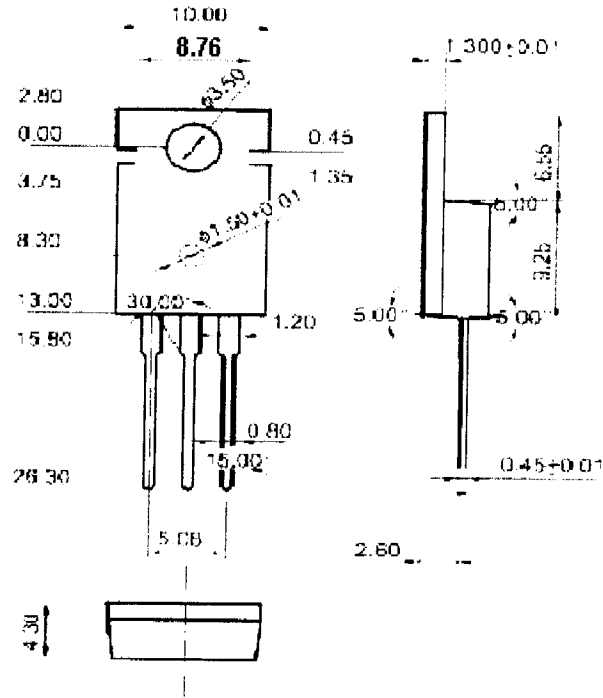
Outline dimensions(unindicated tolerance:±0.10 mm)
